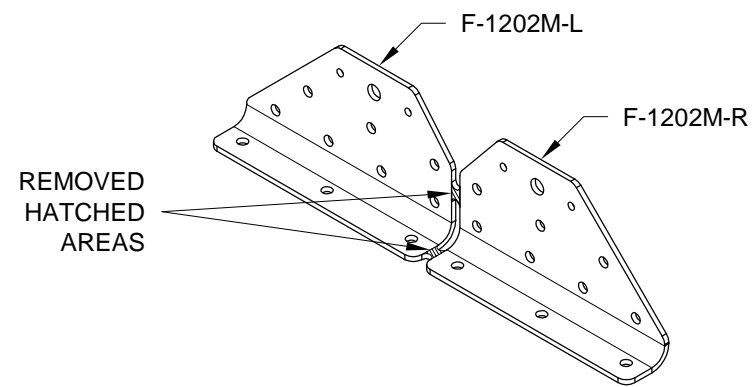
SEPARATING THE CANOPY ATTACH DOUBLERS
